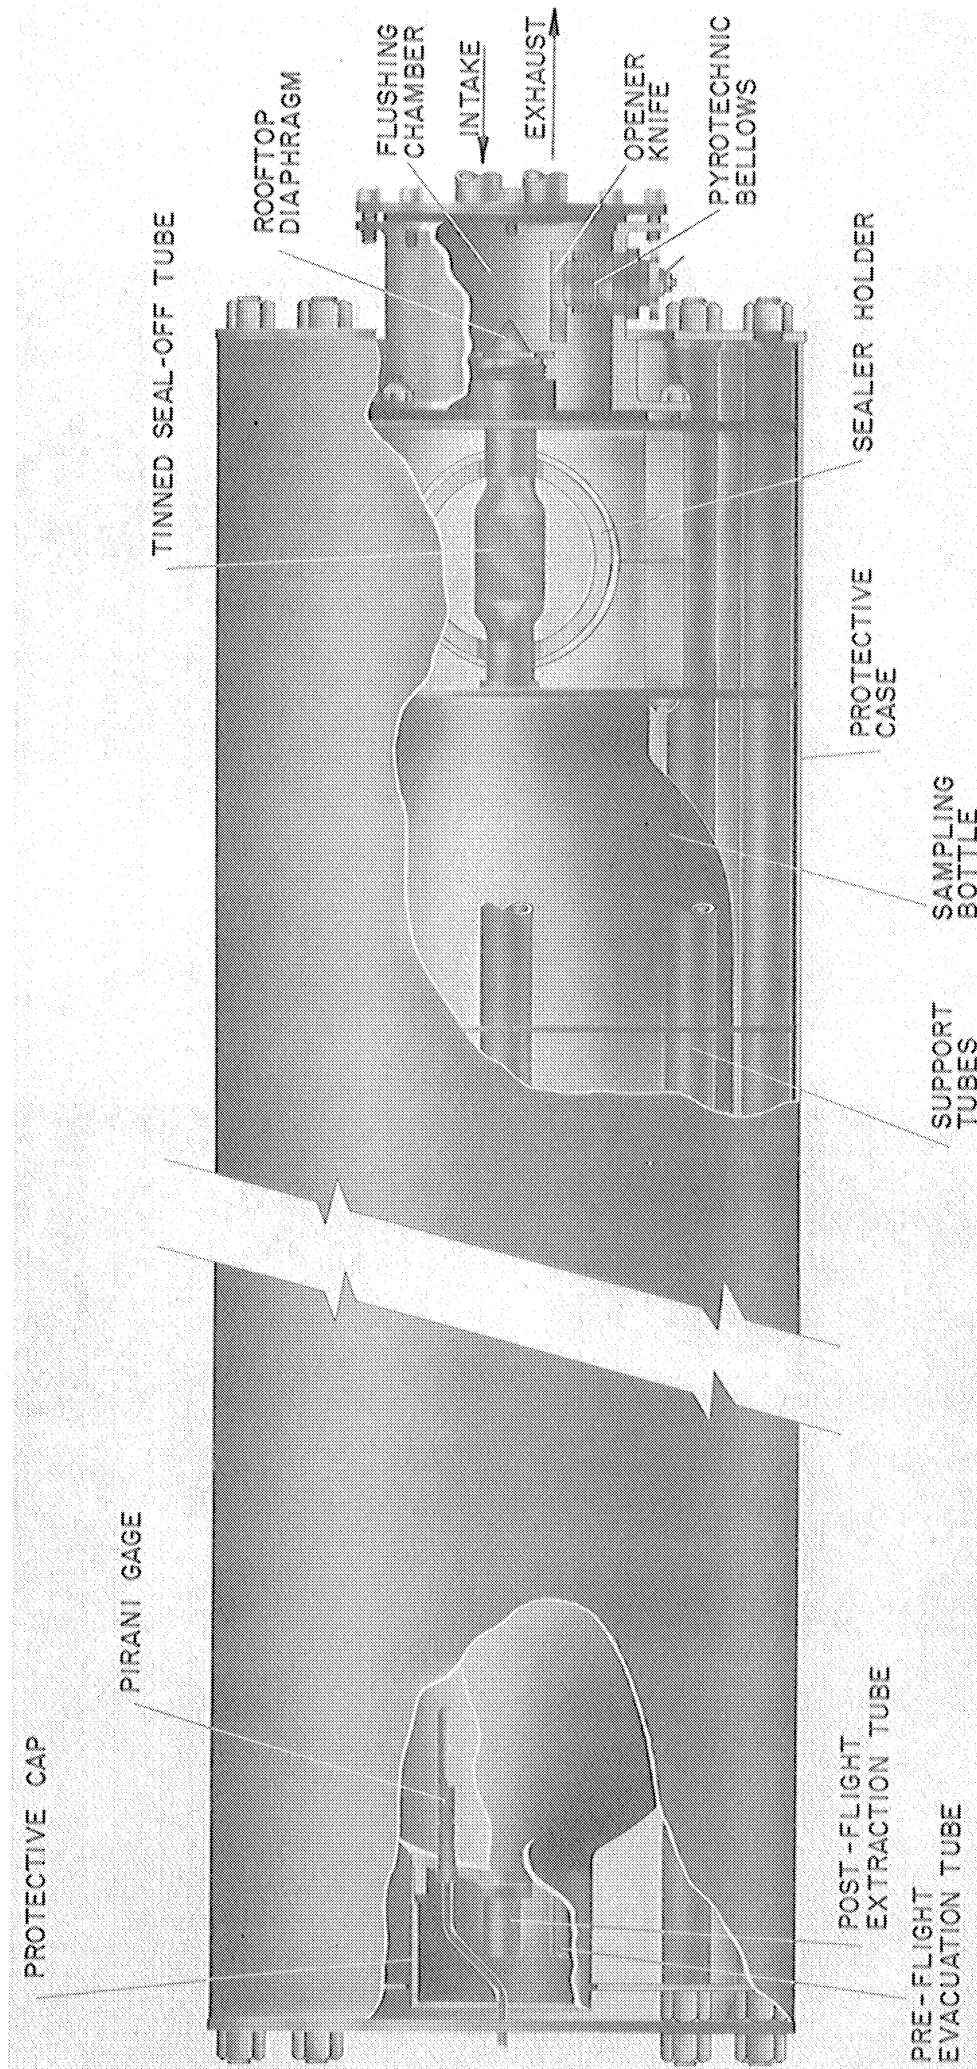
Opener-Sealer Manifold Typical of V-2's and Aerobees
